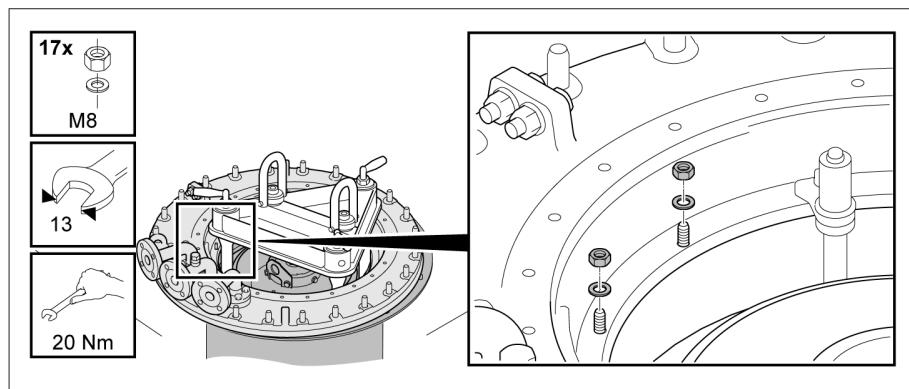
Screwing the on-load tap-changer head onto the supporting flange
